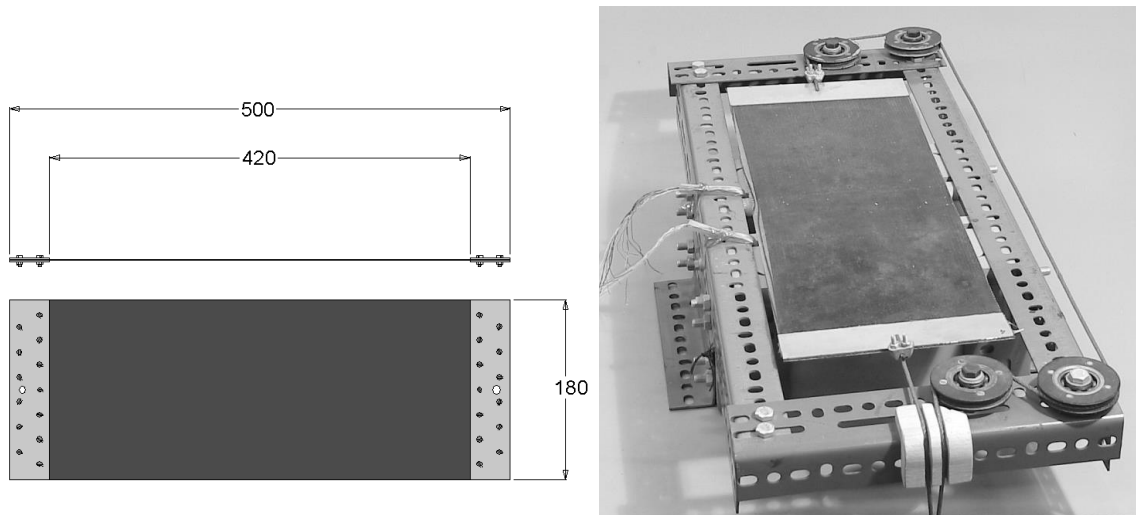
Dimension of the laminate used for the static tests and blank holder frame.
